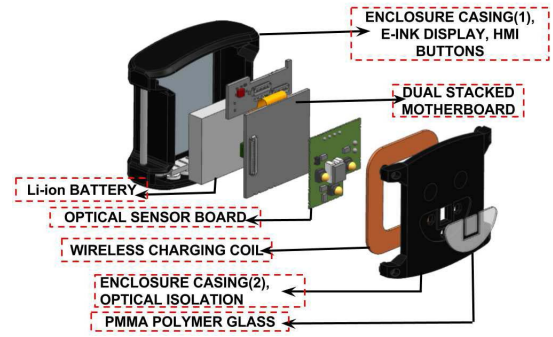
Exploded view of the device showing the arrangement of all the modules.
